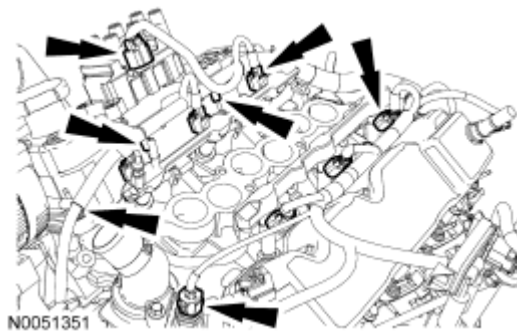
Locating Ignition Coil & Engine Coolant Temperature (ECT) Sensor
